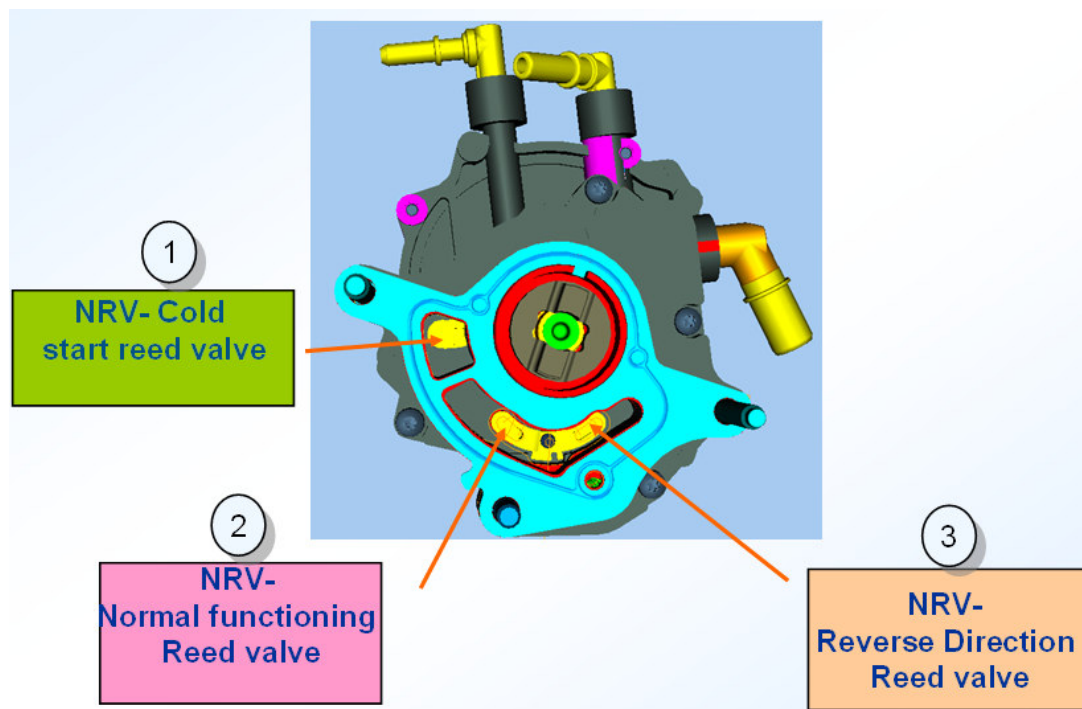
Vacuum pump air oil mixture outlet valves
